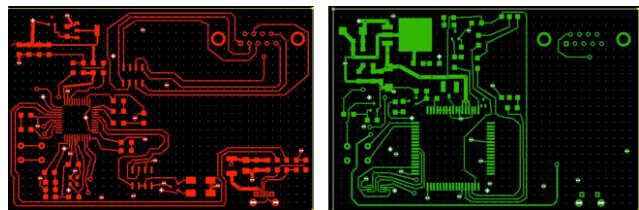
Circuit board layout of POGO 2.0 designed using Eagle PCB design software.
